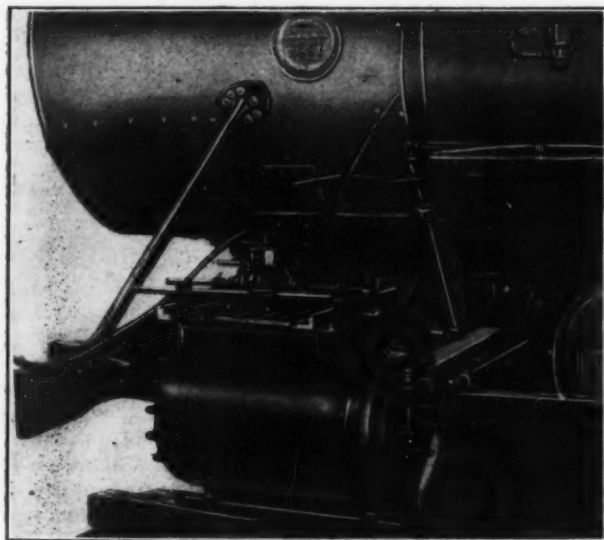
The Machine in Use Grinding the Seat of a Locomotive Slide Valve.
